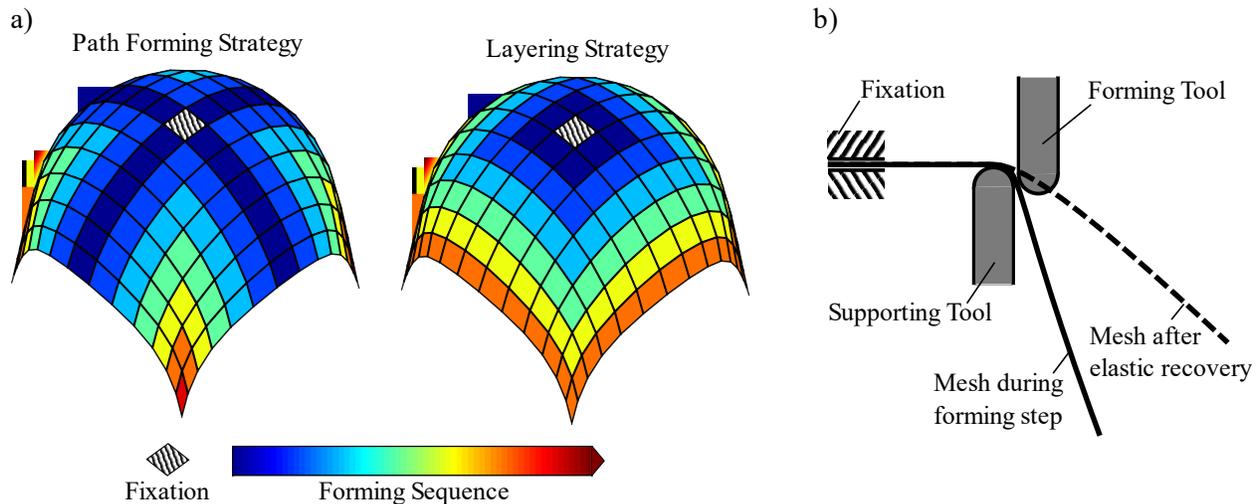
a) Forming Sequences for a hemisphere according to path forming and layering strategies, b) schematic sketch of die-less forming of a wire mesh with two forming tools during and after a forming step
